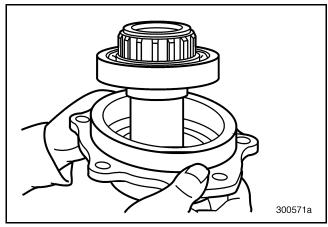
Removing Main Drive Pinion Shaft and Bearing from Cover
